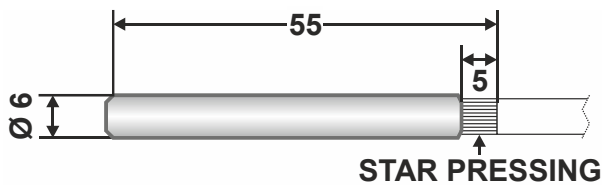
Dimensions of the cable-type bulb sensor in mm
